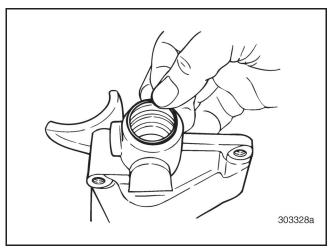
Removing End Plug-to-Housing Bore O-Ring
